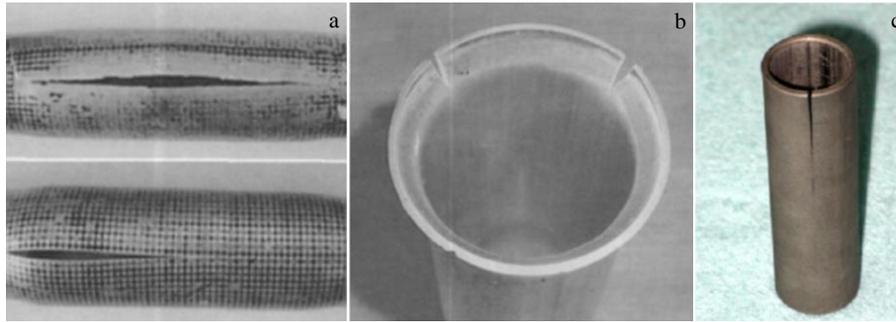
Cracking of the welding line of the pipe formed by the porthole extrusion method in bulging process^[3] (a), extension process^[3] (b), and push bending process^[4] (c)
